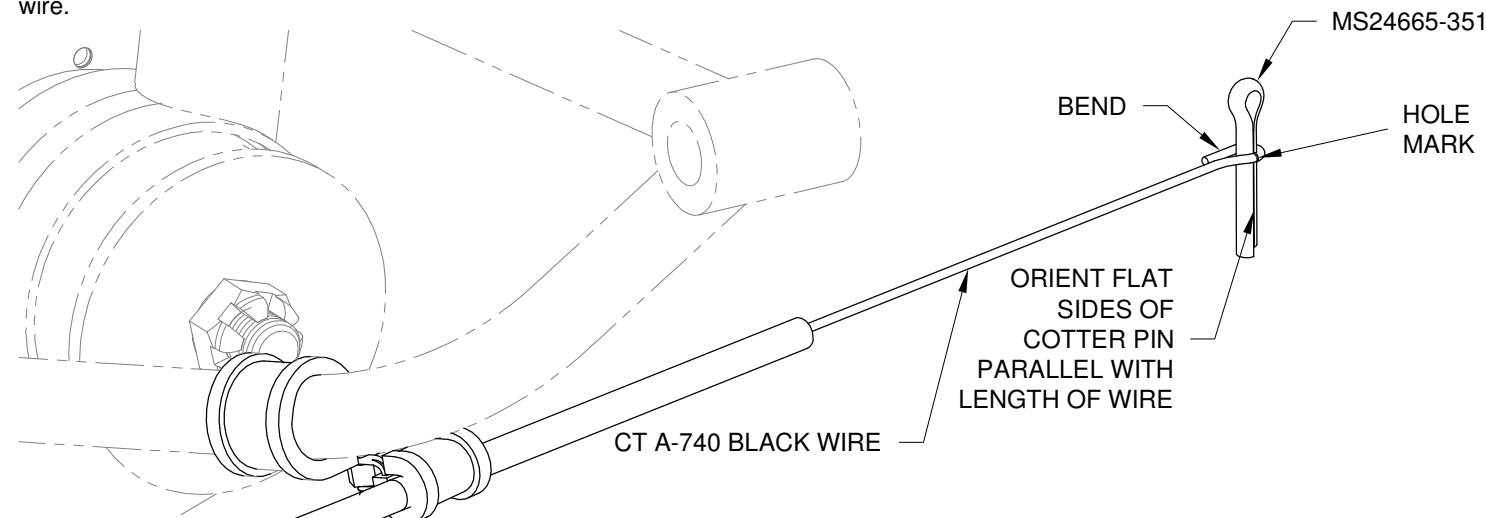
BENDING THE CABIN HEAT CABLE WIRE
